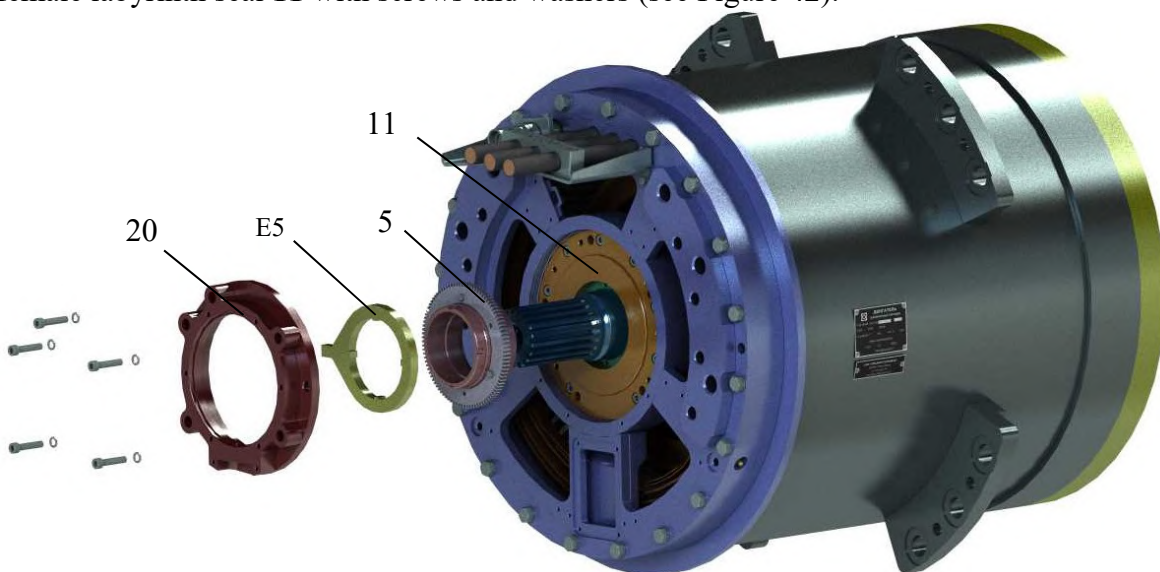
Installation of Serrated Lockwasher and Sensor Cover on the Brake Side
